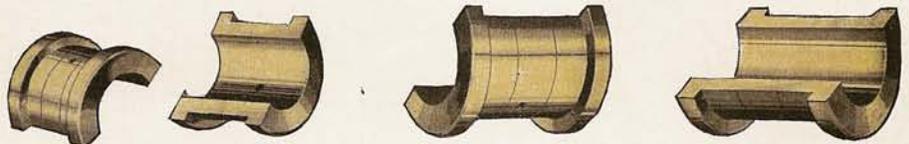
Hand Scraped Phosphor Bronze Bearings for Spindle
